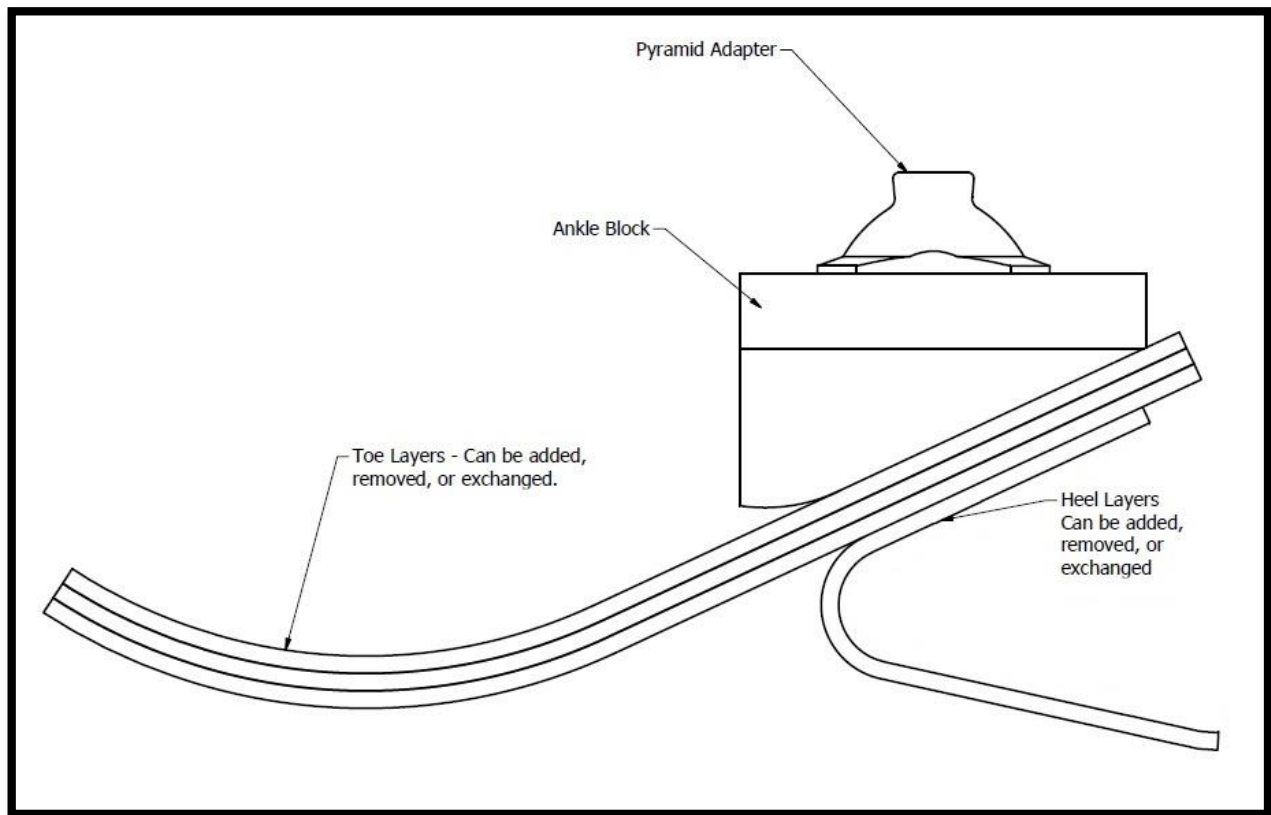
Final Design (FD). This sketch shows the layout of the final design used to manufacture the prototype feet for testing and human trials.
